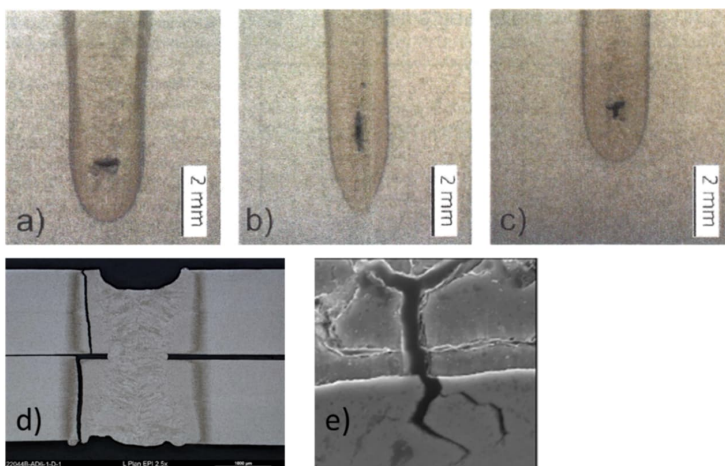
Different types of cracks formed in laser welding: hot cracking - a) horizontal direction, b) vertical direction, c) cross-shaped (Bakir et al., 2020), and d) cold cracking and e) LME cracking (Razmpoosh et al., 2018).
